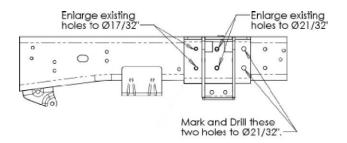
Driver Side Upper Strut Mount Frame Drilling.
